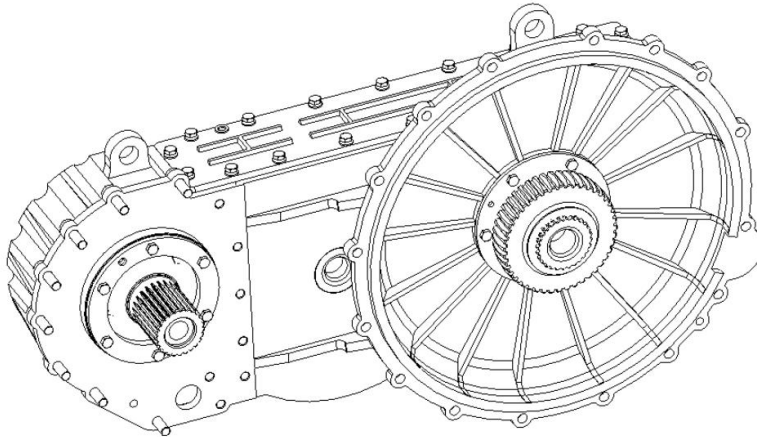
Speed changer gear housing (Transmission gearbox) 2. Composition of case body
